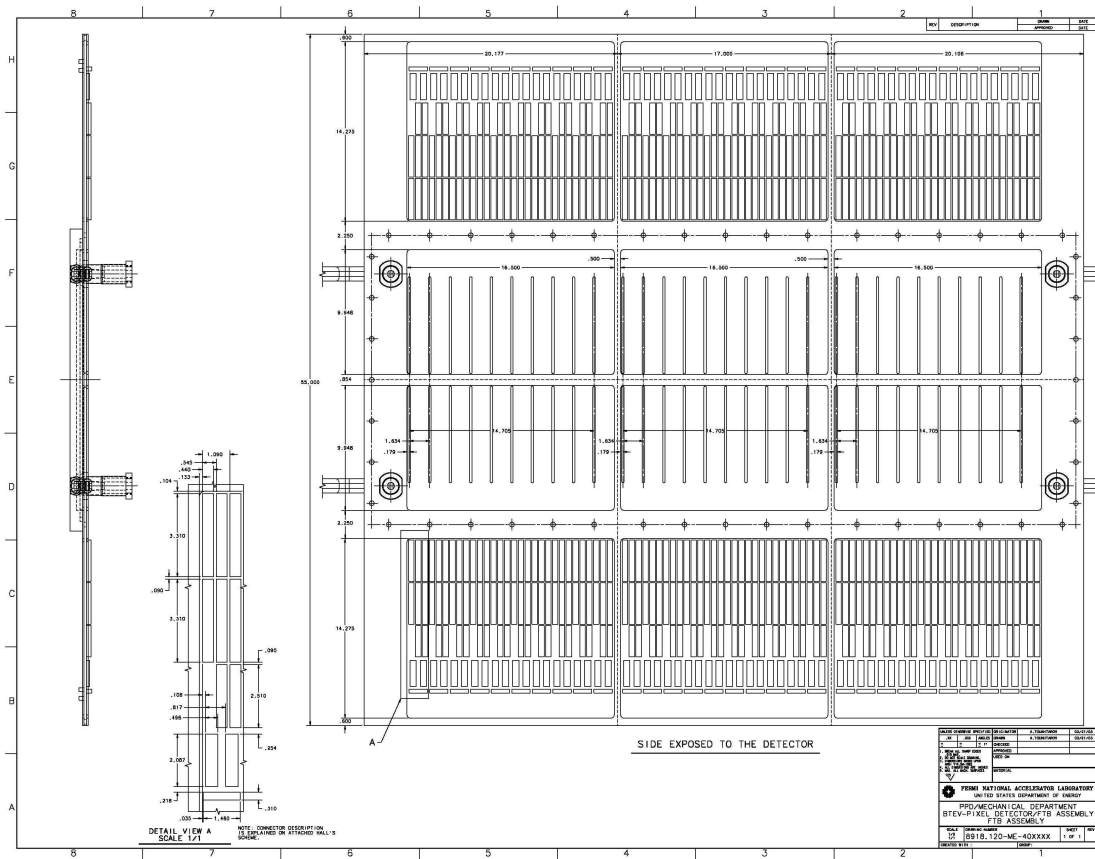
Engineering drawing of the complete feed-through board assembly. Signals are fed through the vacuum vessel via these printed circuit boards with high density connectors.
